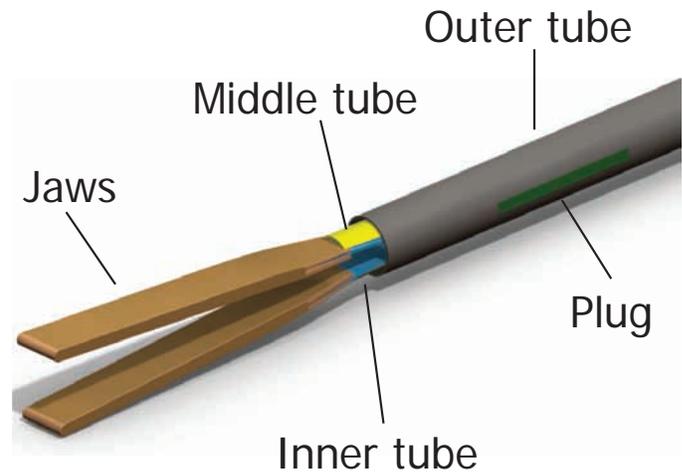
Adhesive grasper: tip detail (without adhesive film)
